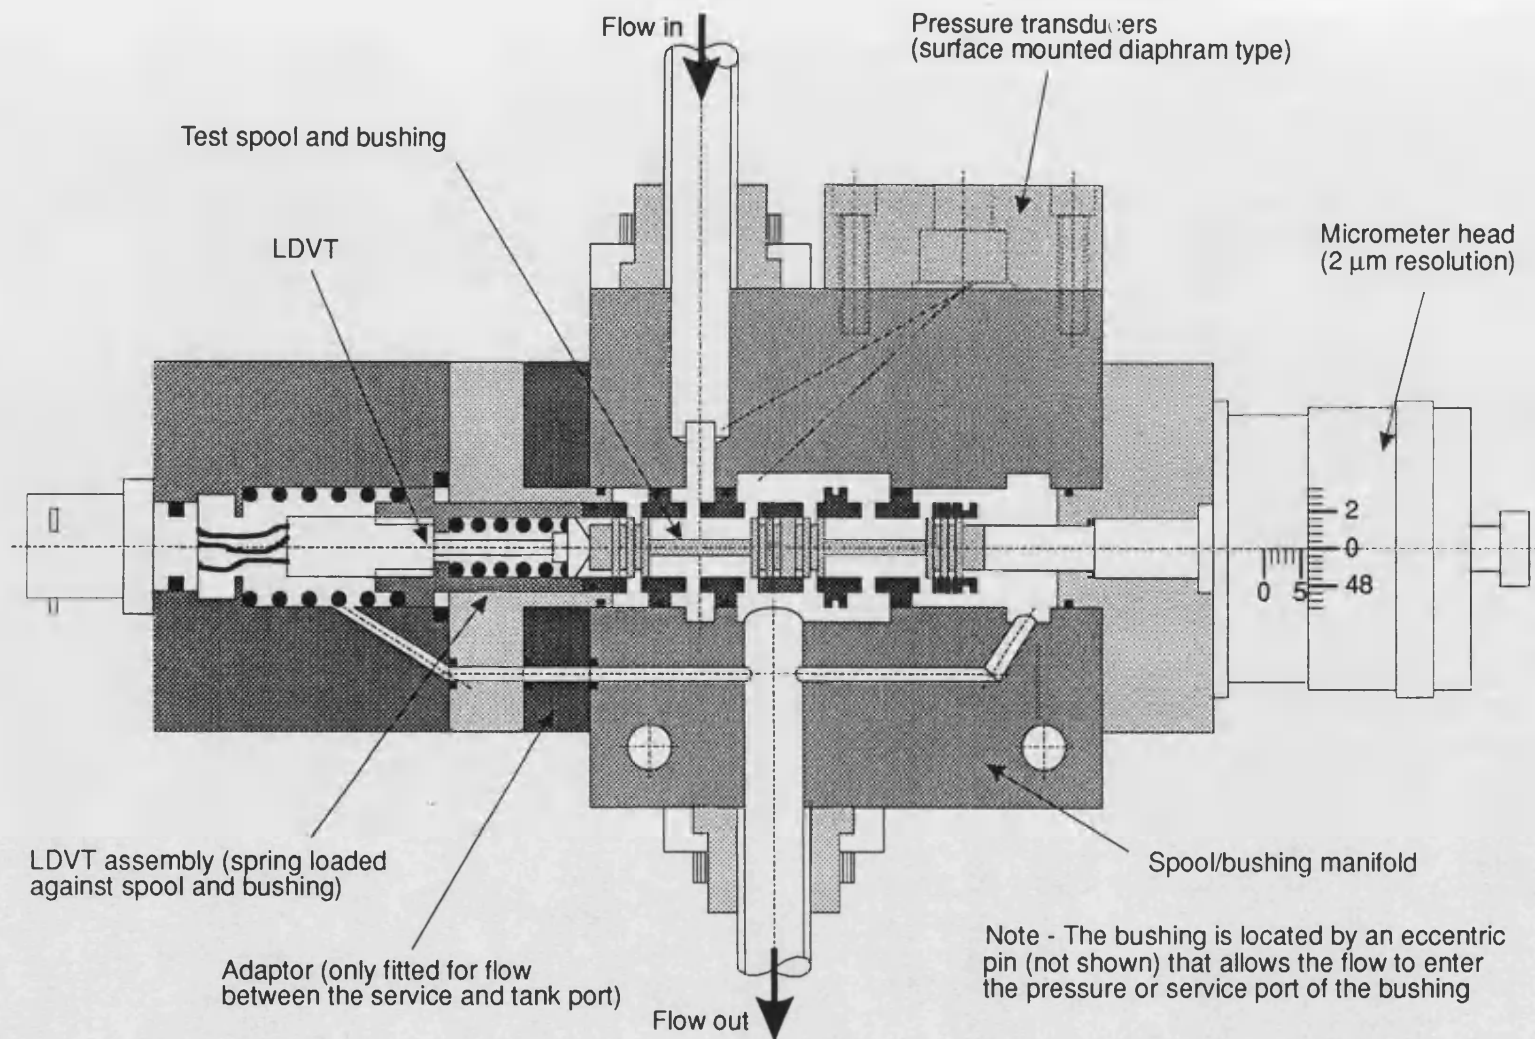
Cross sectional view of spool/bushing valve block, flow S to T.
